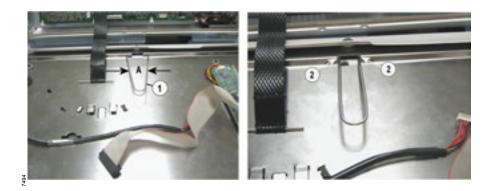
Detail view of operator control unit: Locking spring (unlock position)
